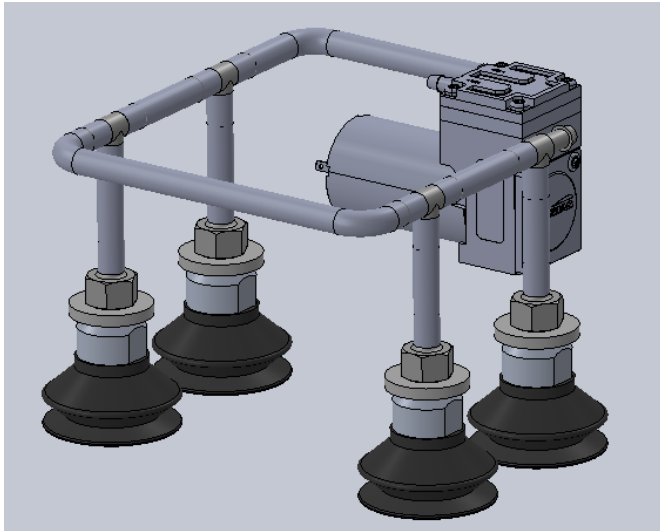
Drivetrain vacuum system CAD design in SOLIDWORKS.
